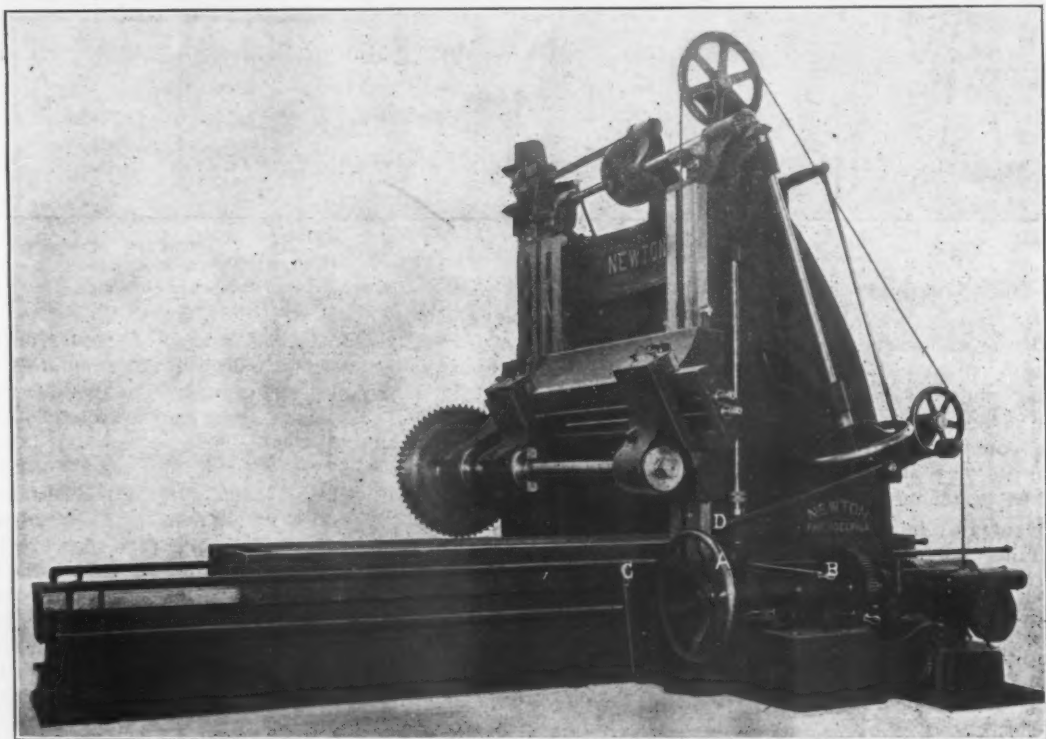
View of the Operating Side of the Newton No. 7 Horizontal Miller.
